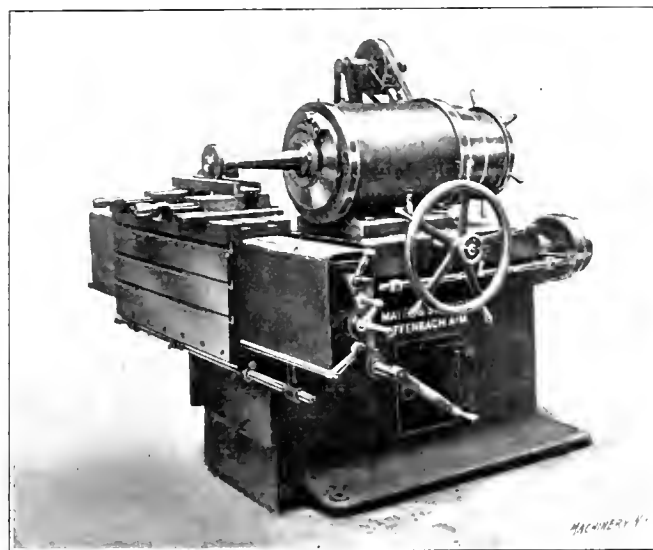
Internal Grinding Machine with Planetary Motion Locked, used for Surface Grinding.
